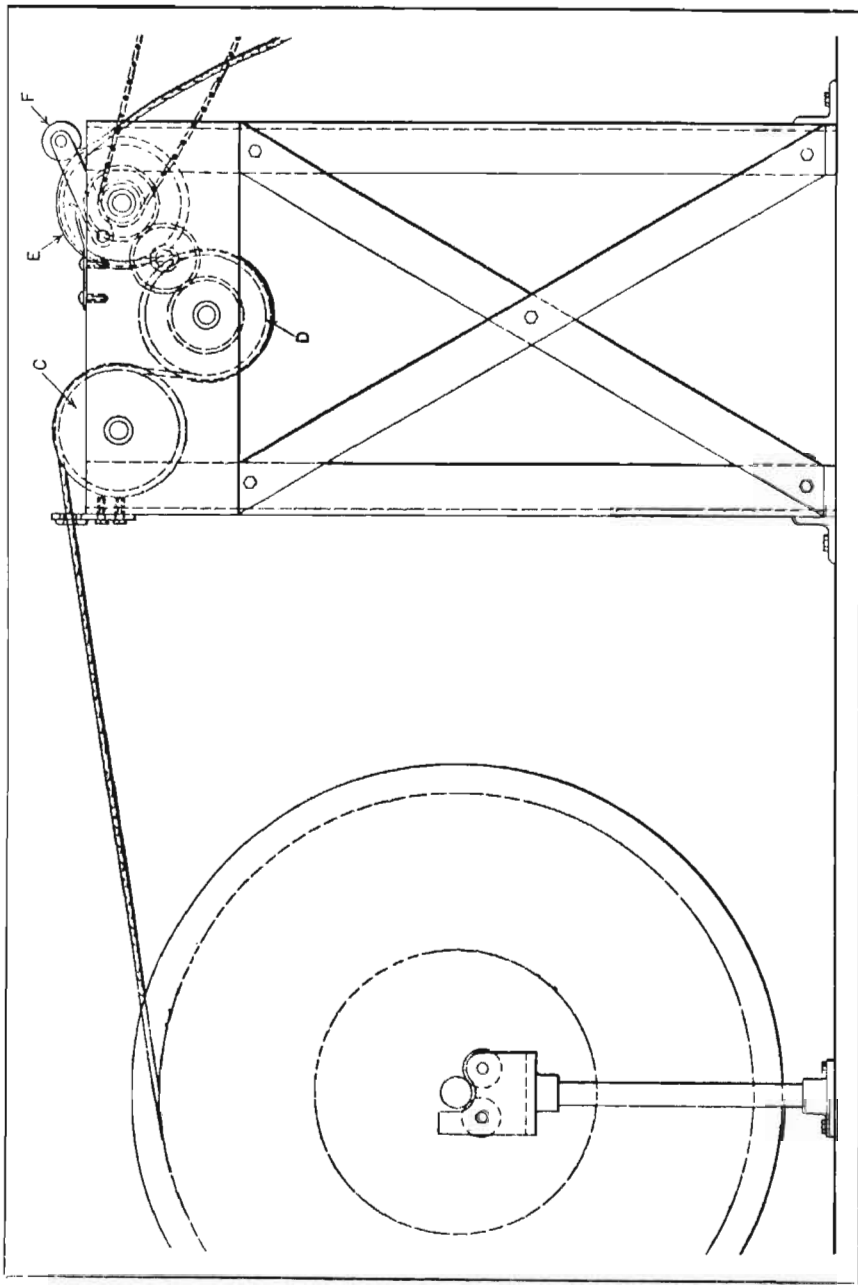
Adjustable-speed Friction-driven Feeding Unit for Wire-cutting Machine—See Continuation, Fig. 13
